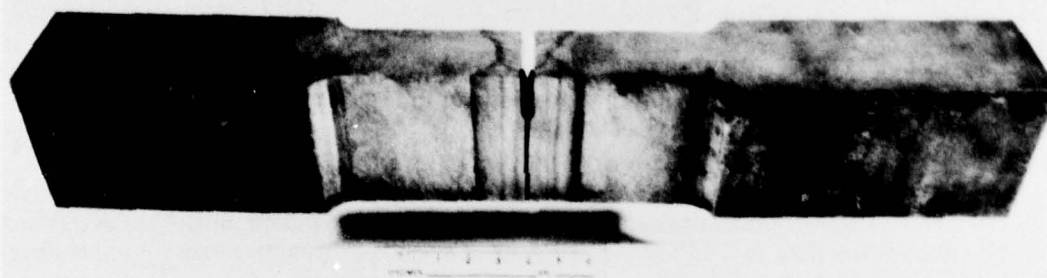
The reduced-section weld-metal specimen for K_{Isc} determination
